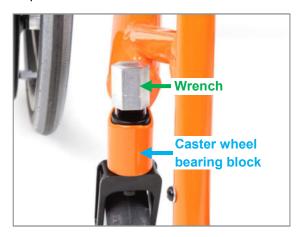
Loosen the nut of the caster wheel axle using the wrench
